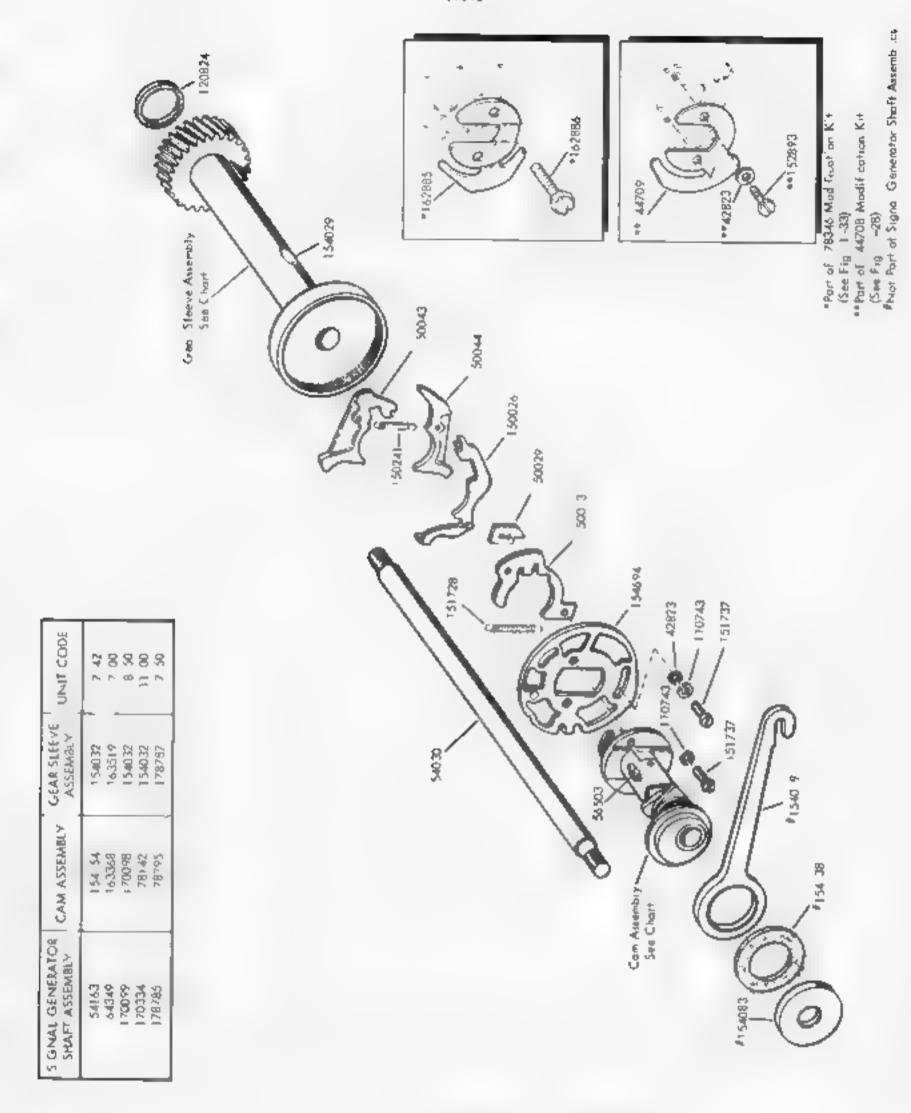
SIGNAL GENERATOR SHAFT ASSEMBLIES
